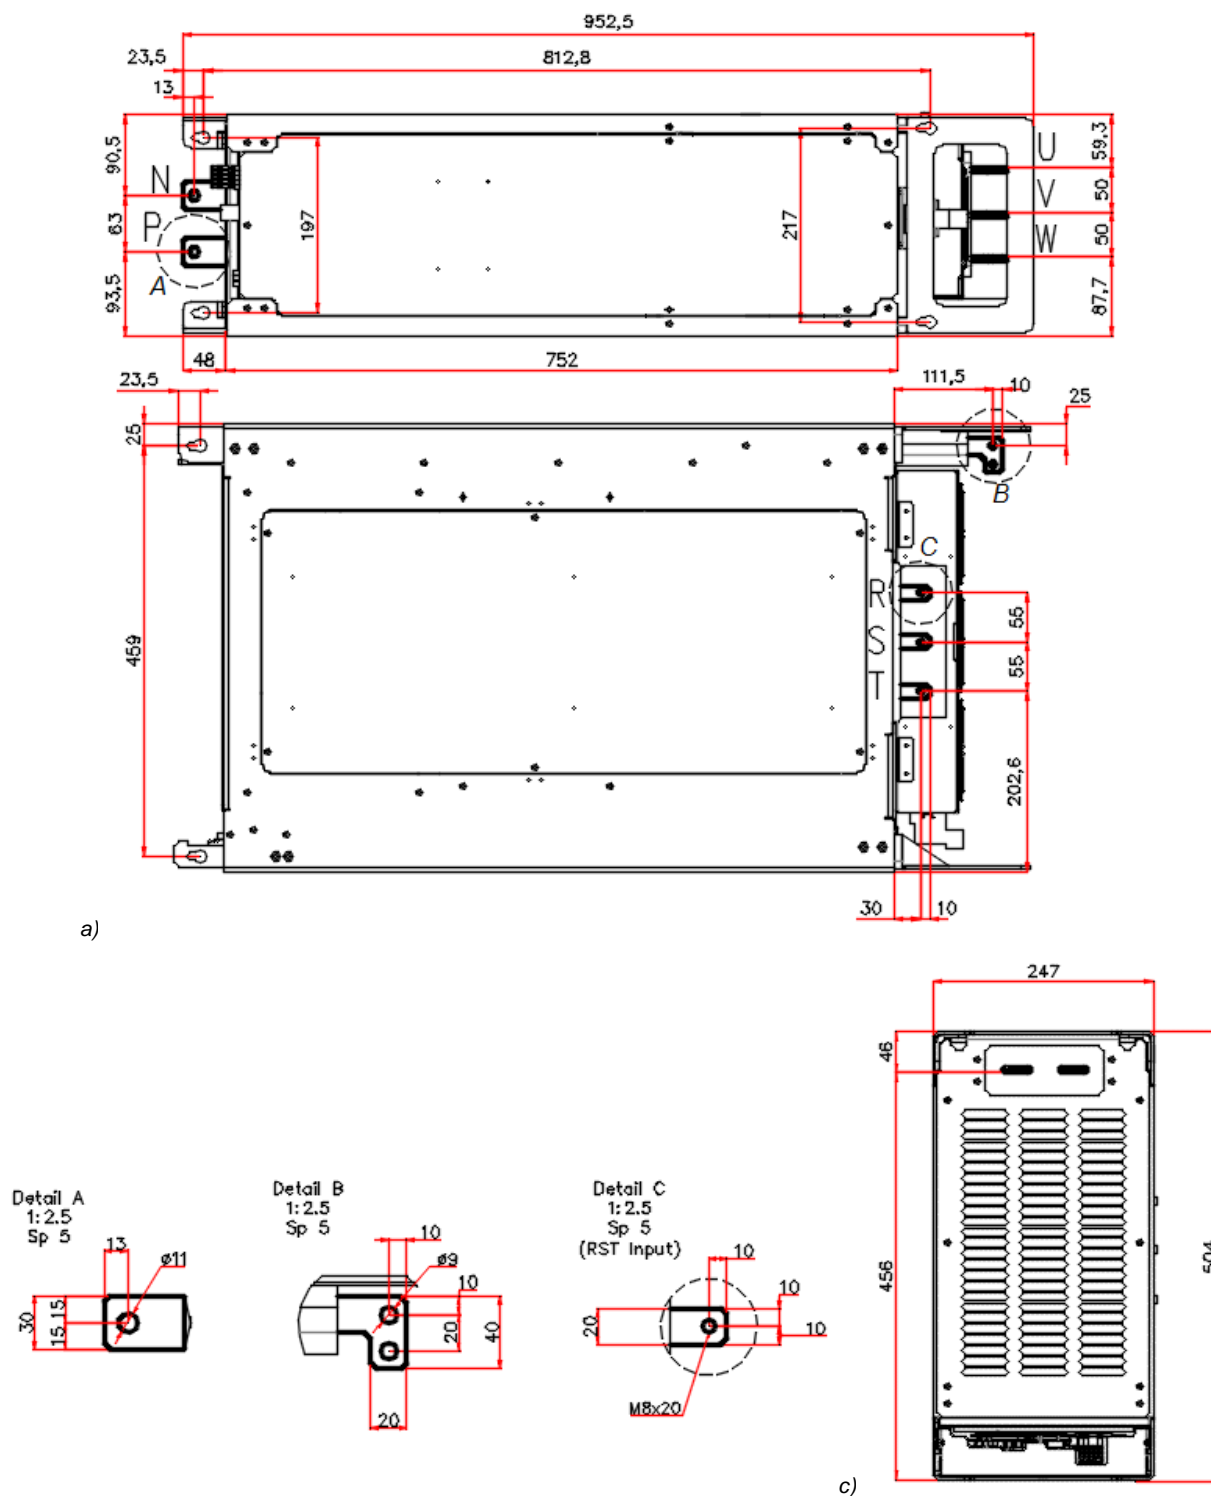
Frame 3 overall dimension. Air cooling system
